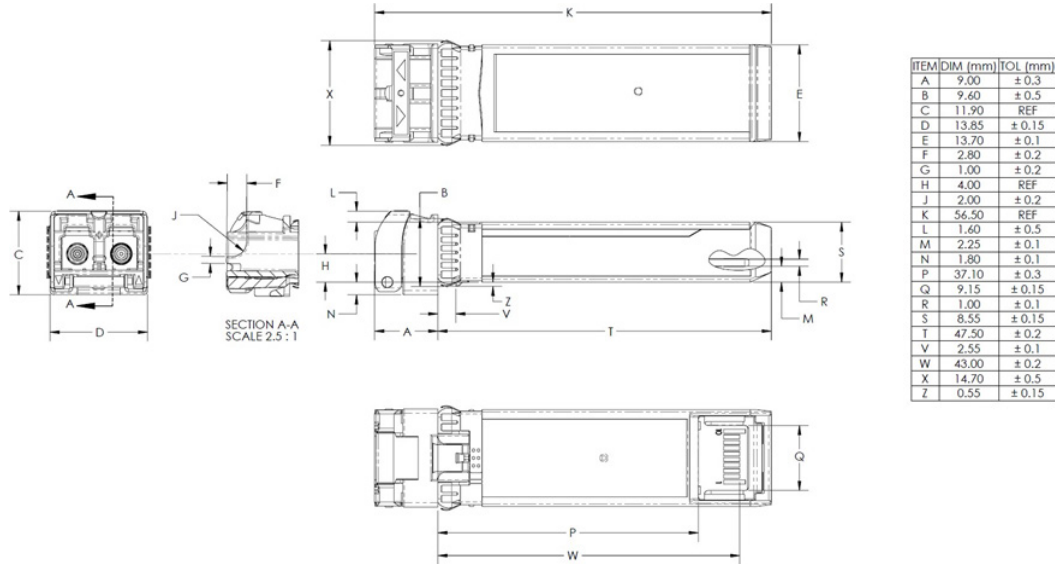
FTLF8556x1BCz (Bail latch) Mechanical Dimensions and Tolerances
